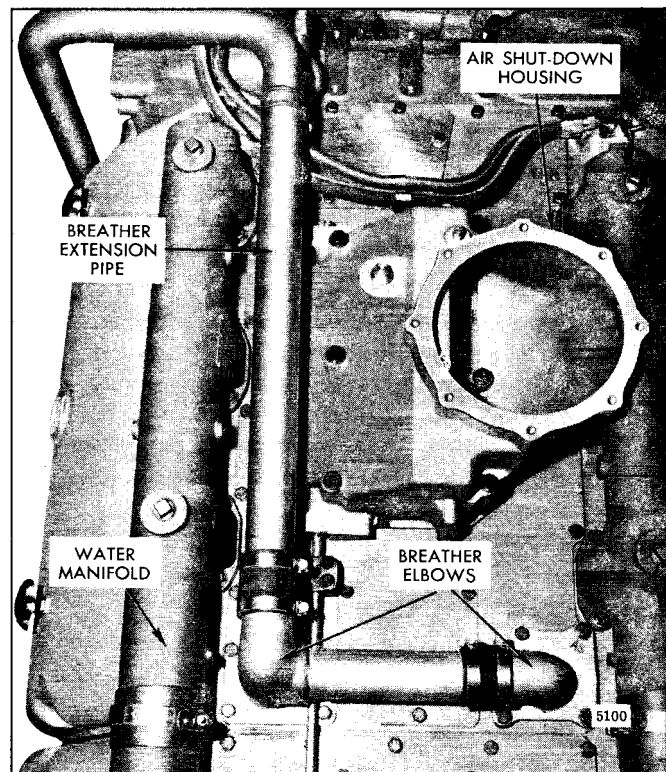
Engine Breather Mounting (Former Naturally Aspirated Engines)
